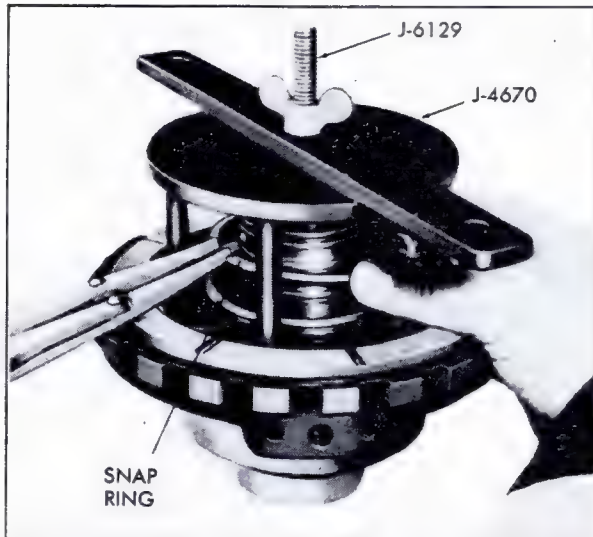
Removing and Installing Intermediate Clutch Piston Snap Rings
